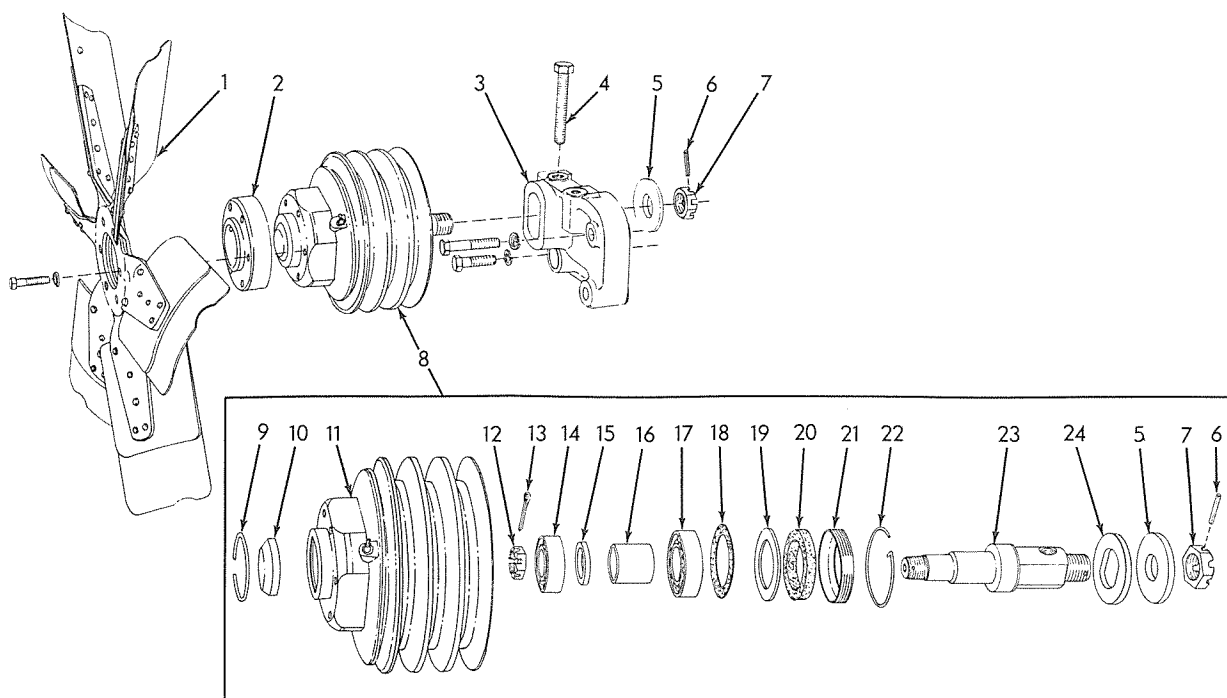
Fan Hub Details (Motor Graders, Tractor Loaders, and Tractor Dozers)
